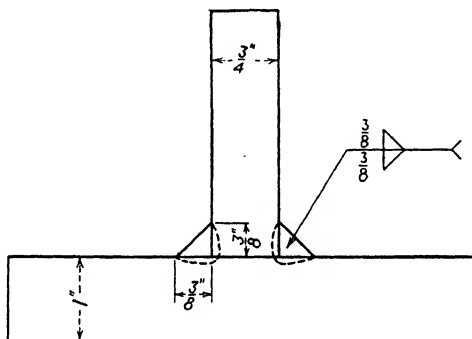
A correctly fitting joint with welds of correct dimensional size according to specifications.
